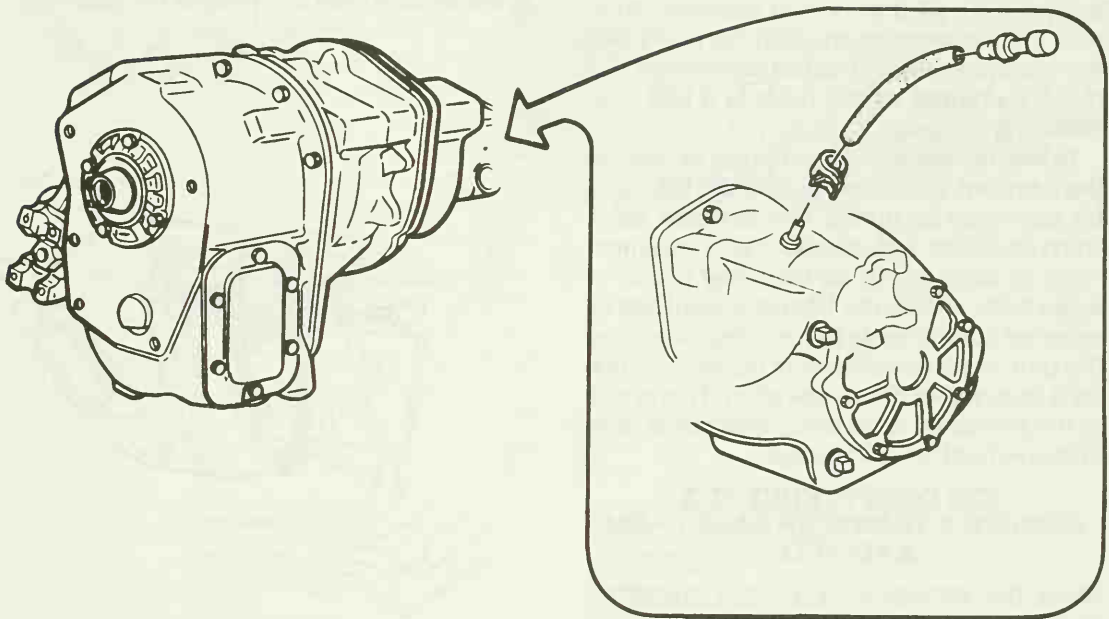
Lubricant is drained by removing a power take-off plate or the lowest bolt in the rear bearing retainer. (GMC Truck and Coach Division of General Motors Corporation)
